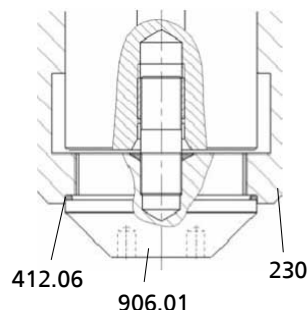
Removing the impeller of Sewatec E 200-401 (Ø 373 mm, bearing bracket S06), K 350-710, K 500-632 and K 500-640
